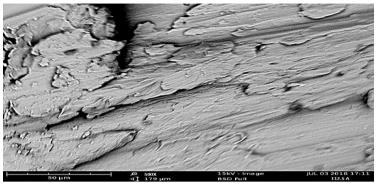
Fracture Surface of Test Specimen of Medium Heat Inputs at 500X Magnifications
